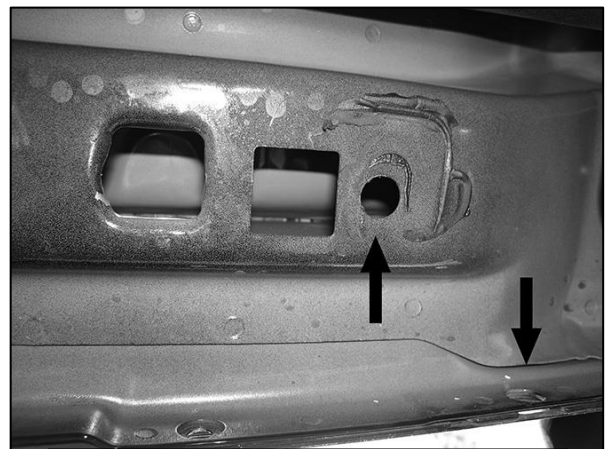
Driver side front mounting location pictured (later model w/threaded insert)
